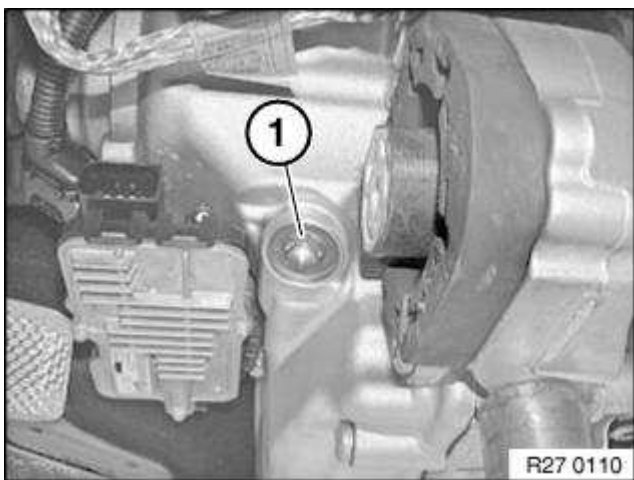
Pour In Transmission Oil Up To Lower Edge Of Opening For Filler Plug (1)
